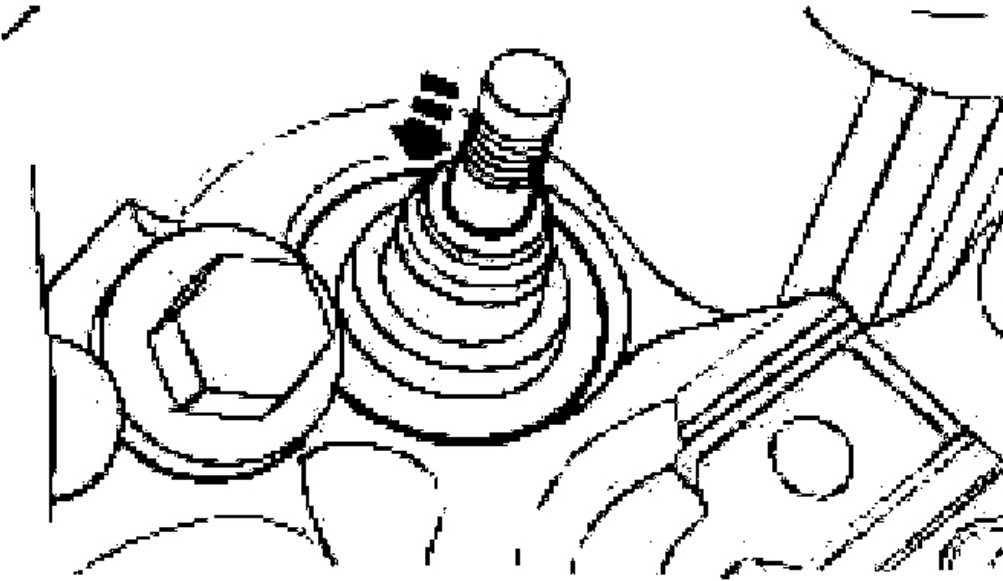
Removing Valve Spring Retainer Keys, Valve Spring Retainers And Valve Springs
